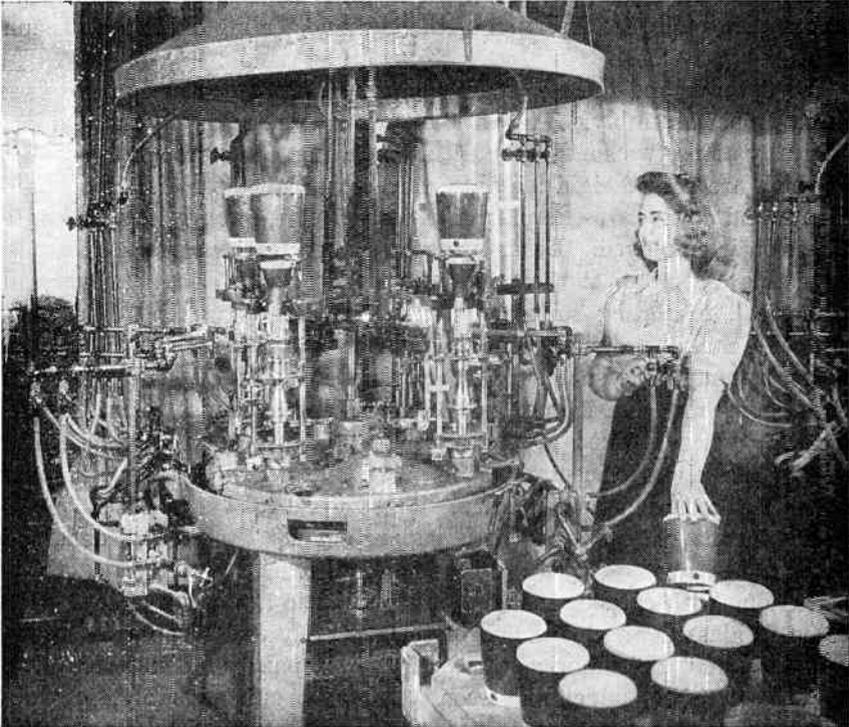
Complete gun and stem assembly being sealed to the already-prepared blank on an automatic sealing machine. (Courtesy of Allen B. Du Mont Labs., Inc.)
